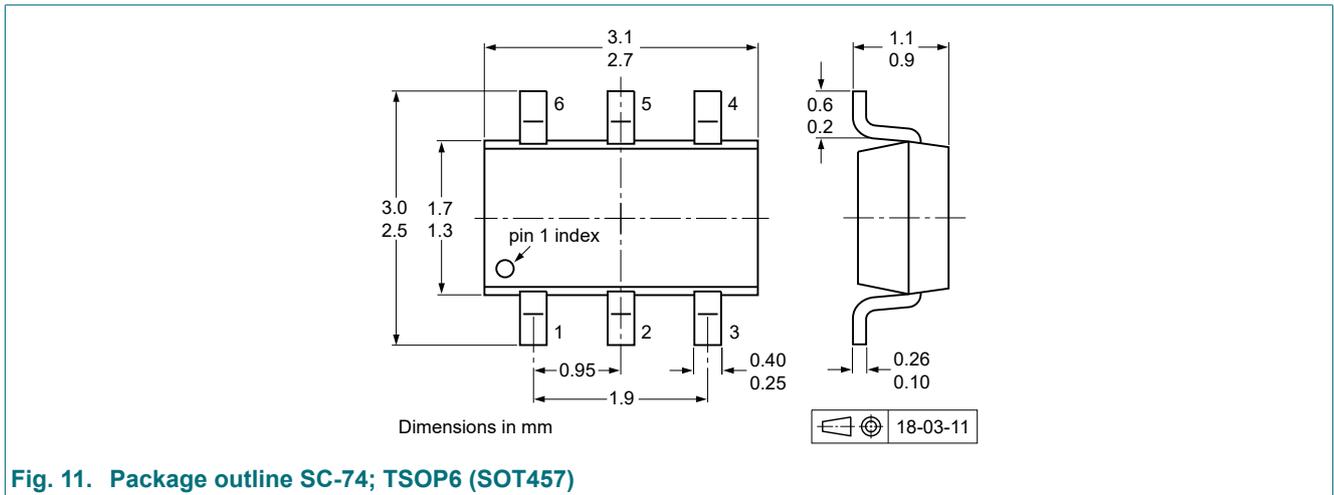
Package outline SC-74; TSOP6 (SOT457)
